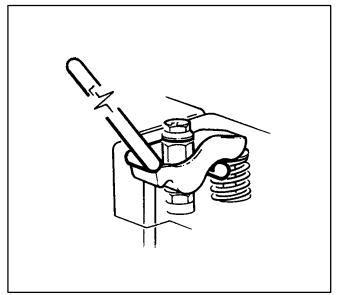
HYDRAULIC TAPPET TOOL
